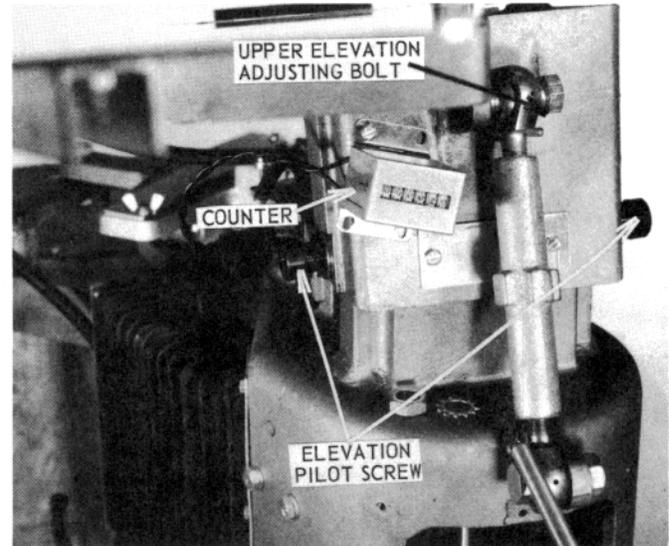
Counter, Elevation Adjusting Assembly Bolts, and Elevation Pivot Screws
